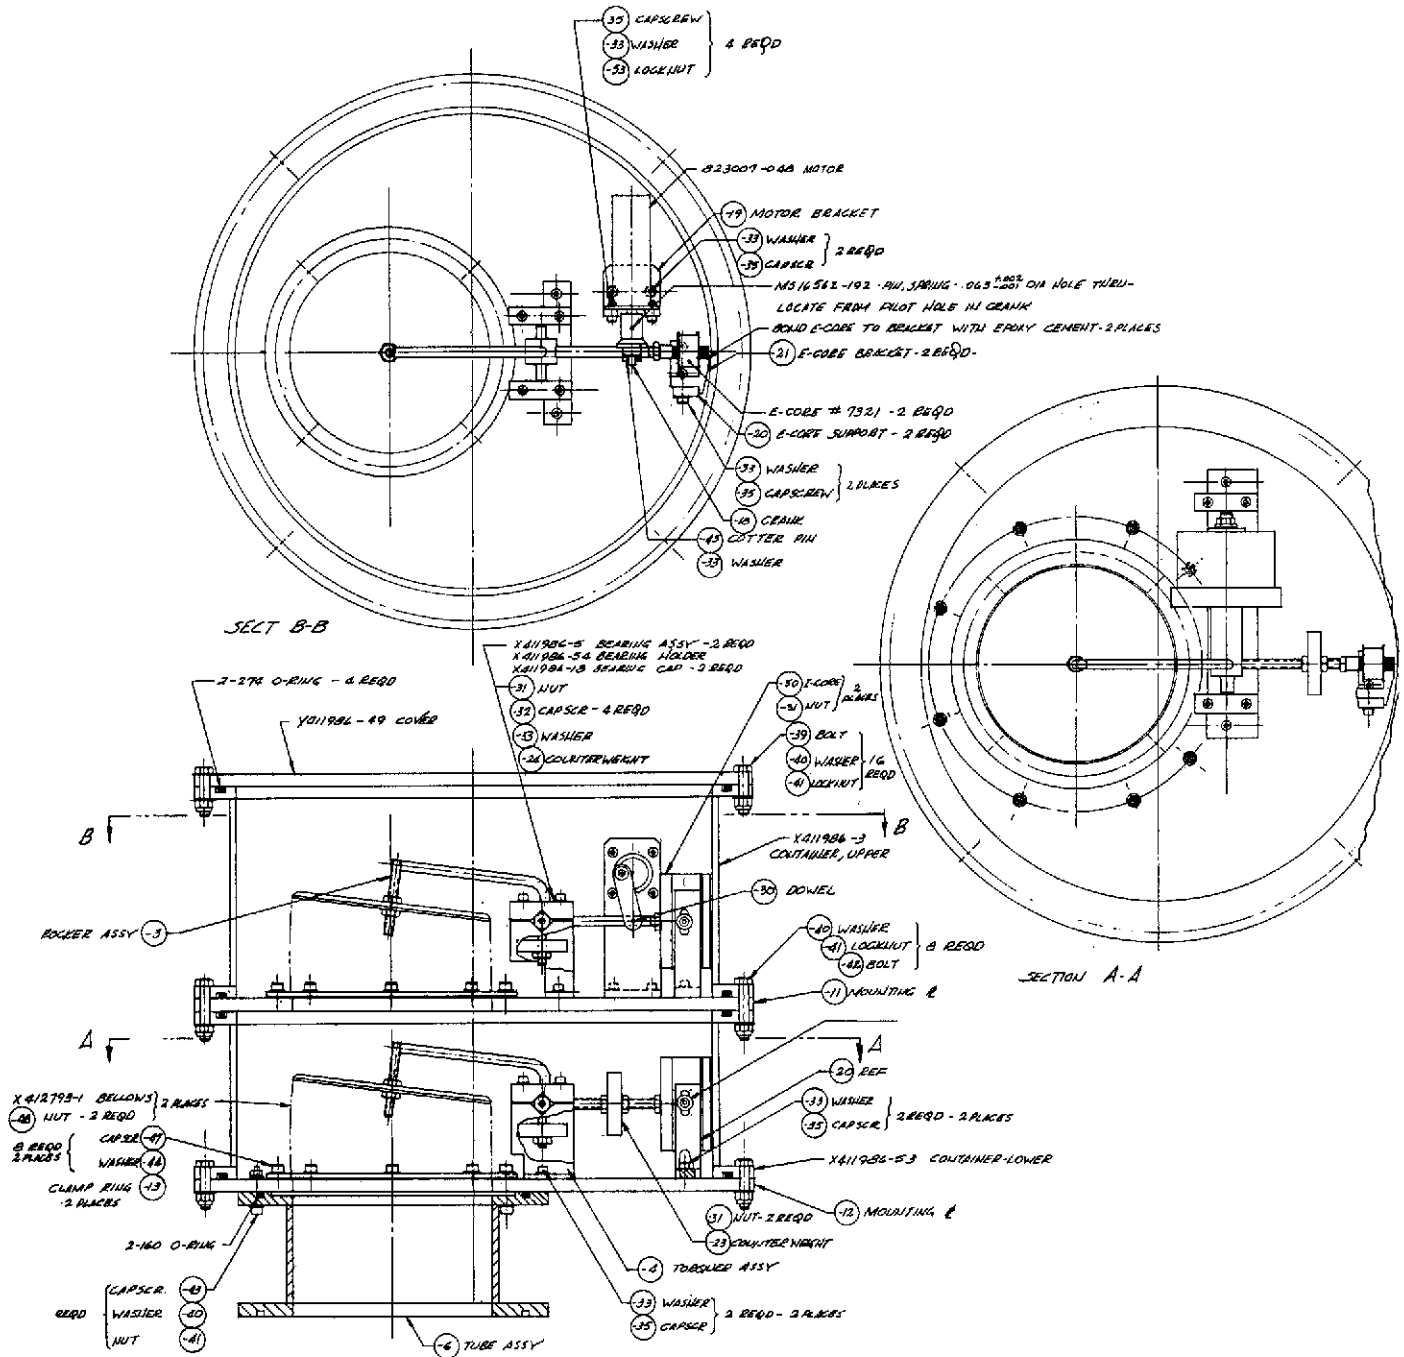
Augmented RIGS Sensor Assembly Drawing
